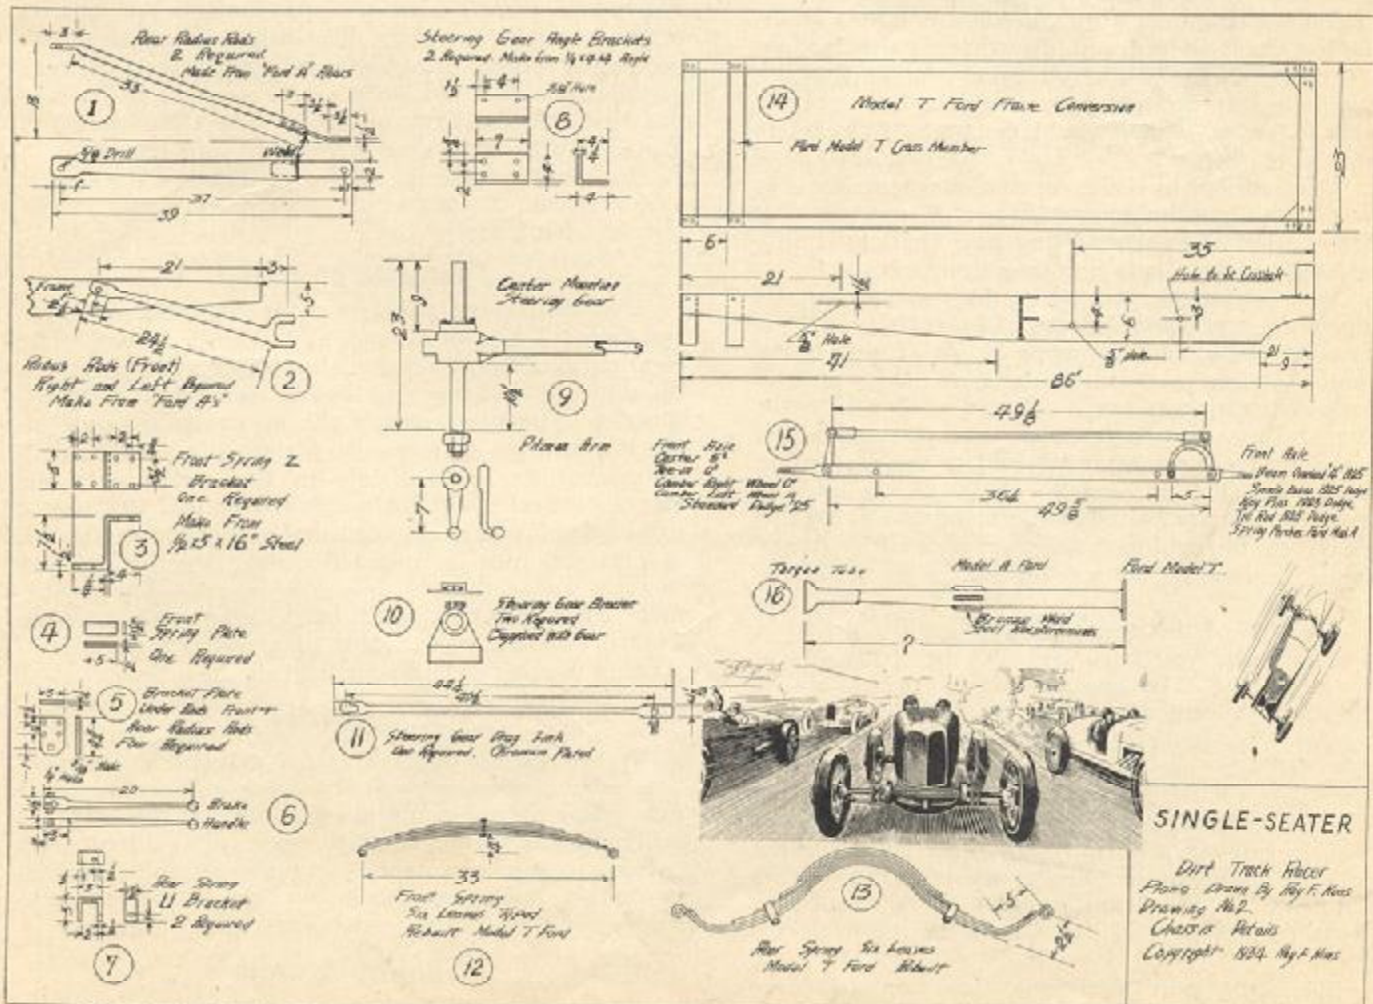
Chassis Details the Single-Seater Dirt Track Car
